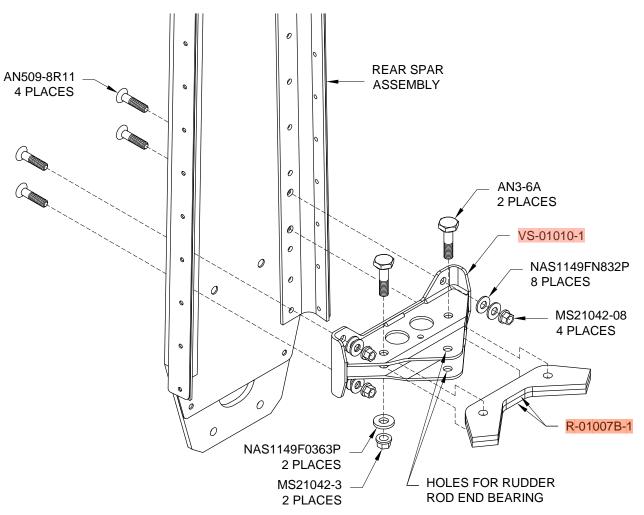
ATTACHING THE BOTTOM HINGE BRACKET AND RUDDER STOPS
